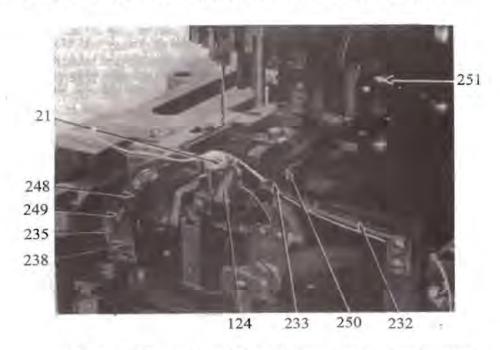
Showing the Needle Thread Waste Loop Remover and the Cord Pull-back Device
